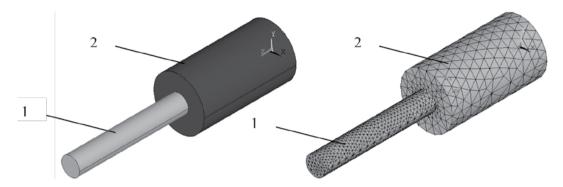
Finite element model of pressure coupling parts for simulations of bending load and rotation: 1 – end mill, 2 – shrink-fit holder
